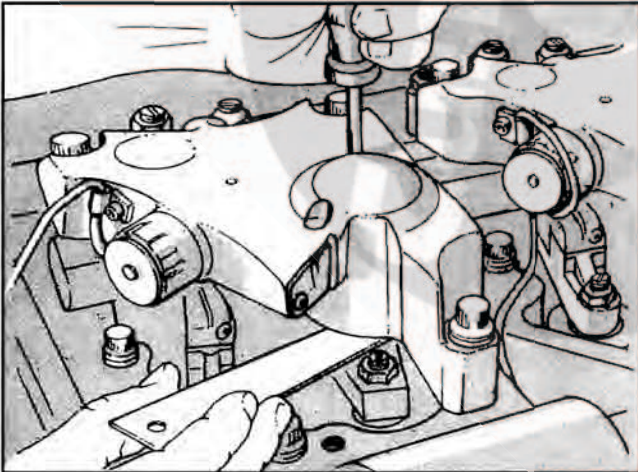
, (OM1063L). Adjusting crosshead to slave piston clearance
